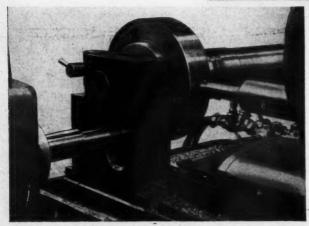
Close-up view of the set-up, on one of a battery of Kearns S-type horizontal boring machines, which provides for finishing the axial and radial holes in the cam-lock noses for lathe spindles. The boring bar at the left is mounted in the main spindle of the Kearns machine, and the bar at the right is fitted to an independently-driven spindle, mounted in a slide which has power traverse on guideways on the fixture base. The lathe spindle is located by a plunger that engages the rough-machined axial holes
